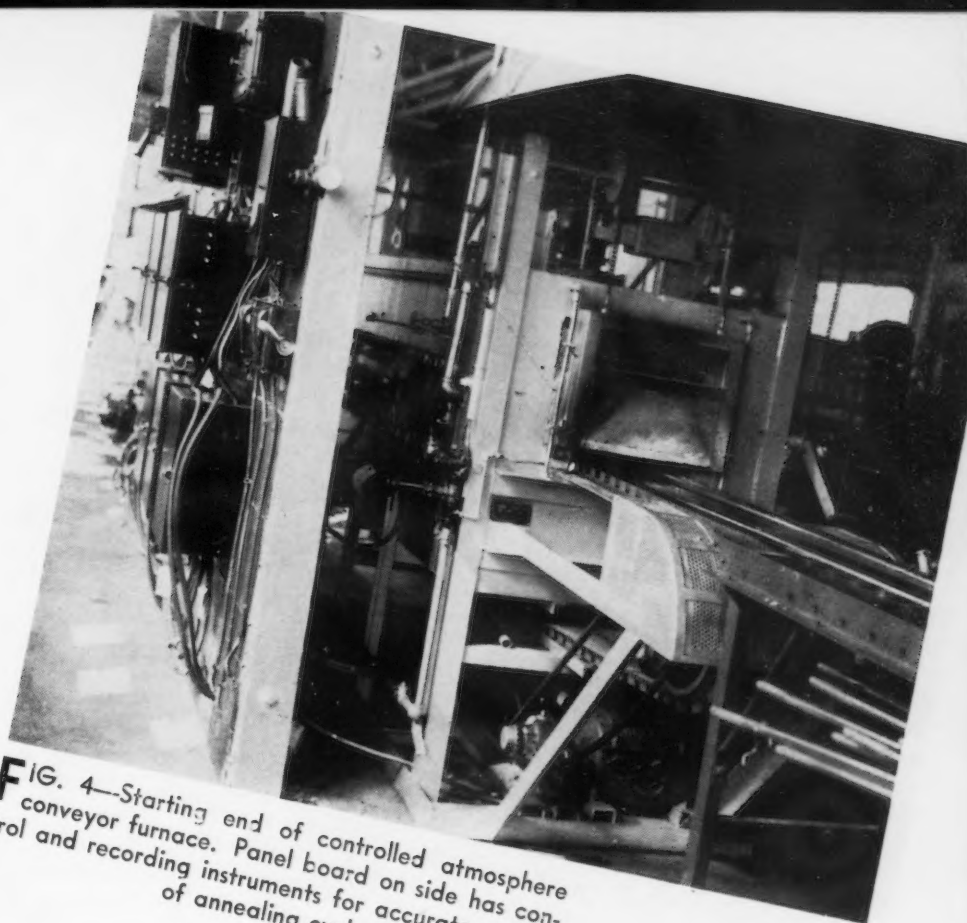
Starting end of controlled atmosphere conveyor furnace. Panel board on side has control and recording instruments for accurate control of annealing cycle.
